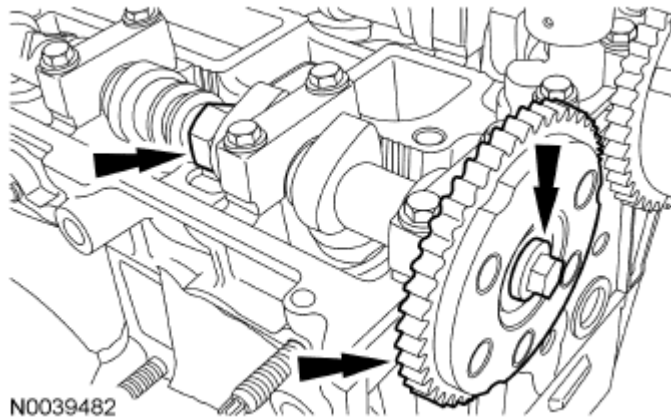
Locating Flats On Camshaft, Bolt And Exhaust Camshaft Sprocket
